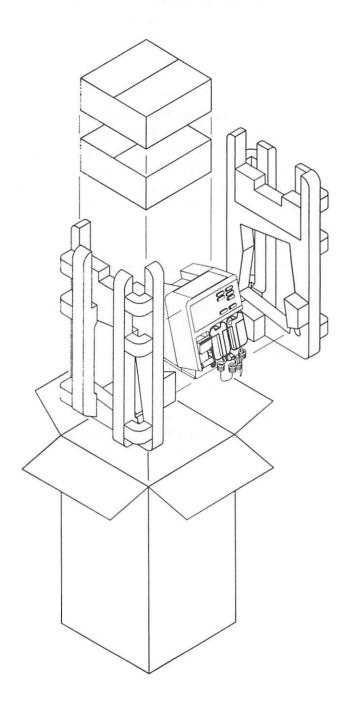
LIFEPAK 9A defibrillator/monitor Shipping Assembly
